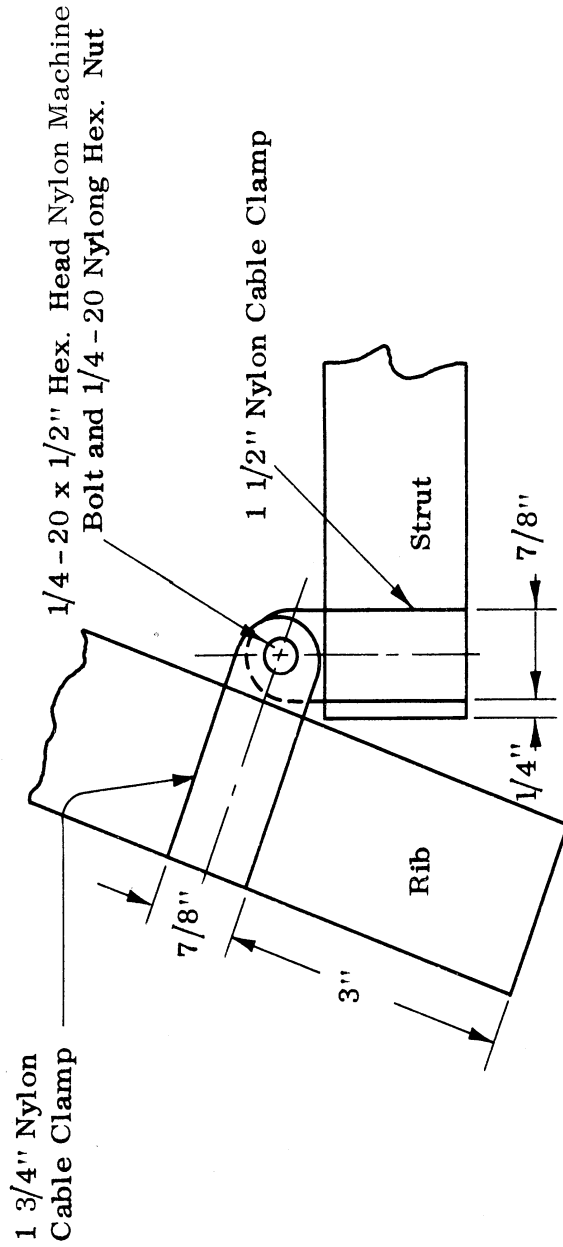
DETAIL A - CONNECTION OF LOWER STRUT TO RIB
